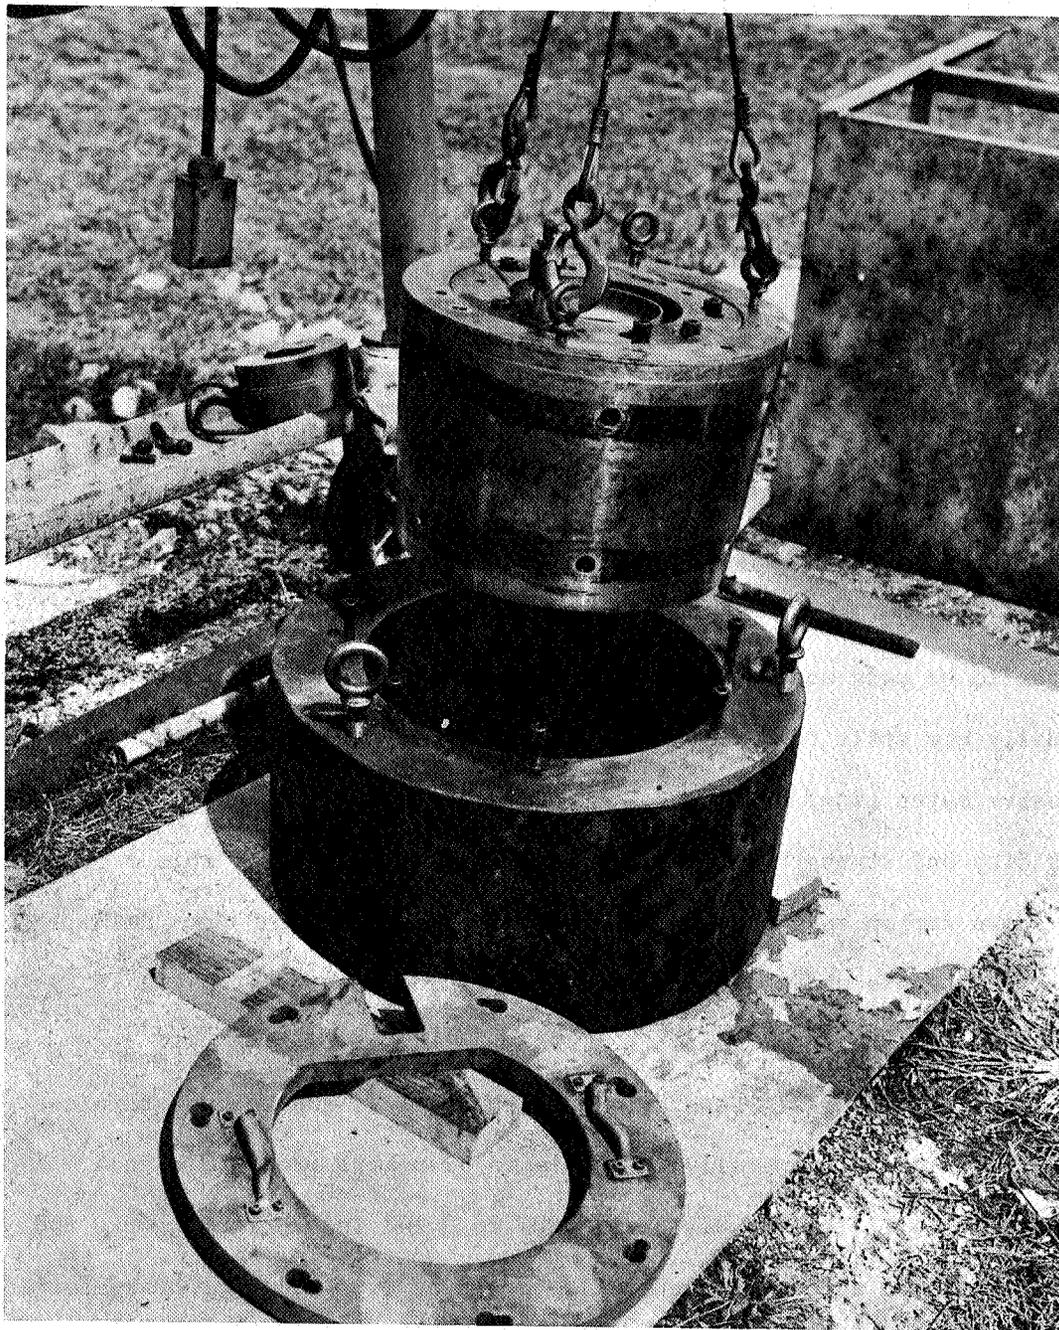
TOOLING CONSISTING OF 4140 STEEL DIE INSERT AND 4340 STEEL OUTER RING WITH TAPERED INTERFACE USED FOR EXPLOSIVE TOOL BULGING
